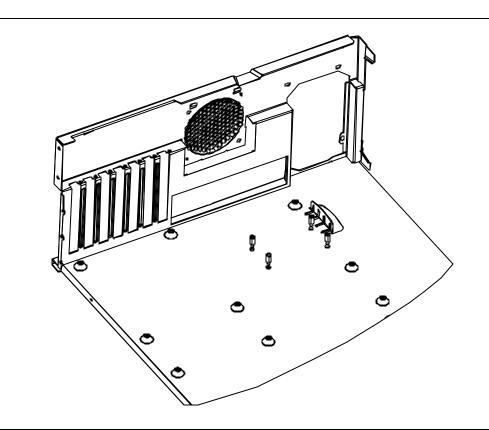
ATX Chassis Mounting Holes for Pentium® 4 Processors
